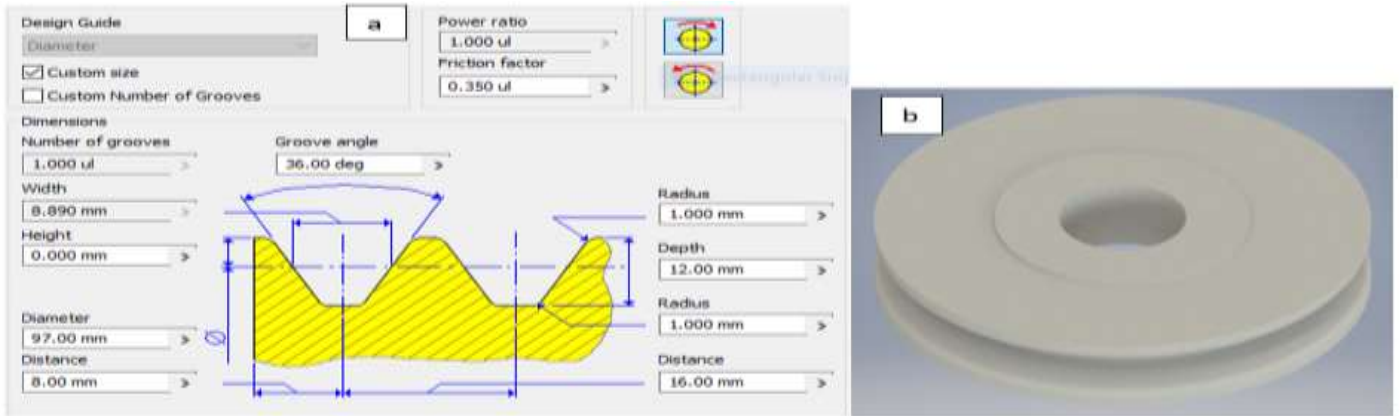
(a) Design geometry of the driven pulley (b) CAD model of the driven pulley
